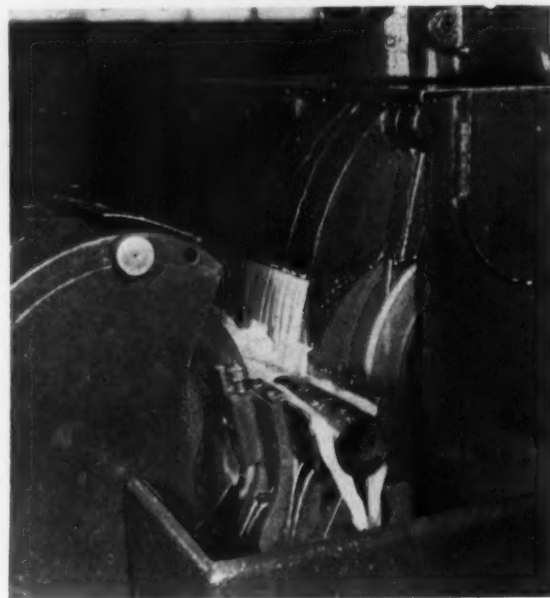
Grinding thin walled stainless steel tubing by the through feed method in a No. 12 centerless grinder. Courtesy Landis Tool Co., Waynesboro, Pa.
